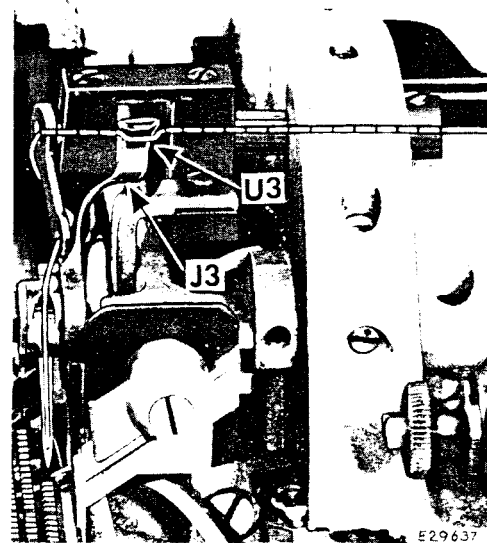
Needle Thread Controller 164151 in Correct Relation to Needle Thread
